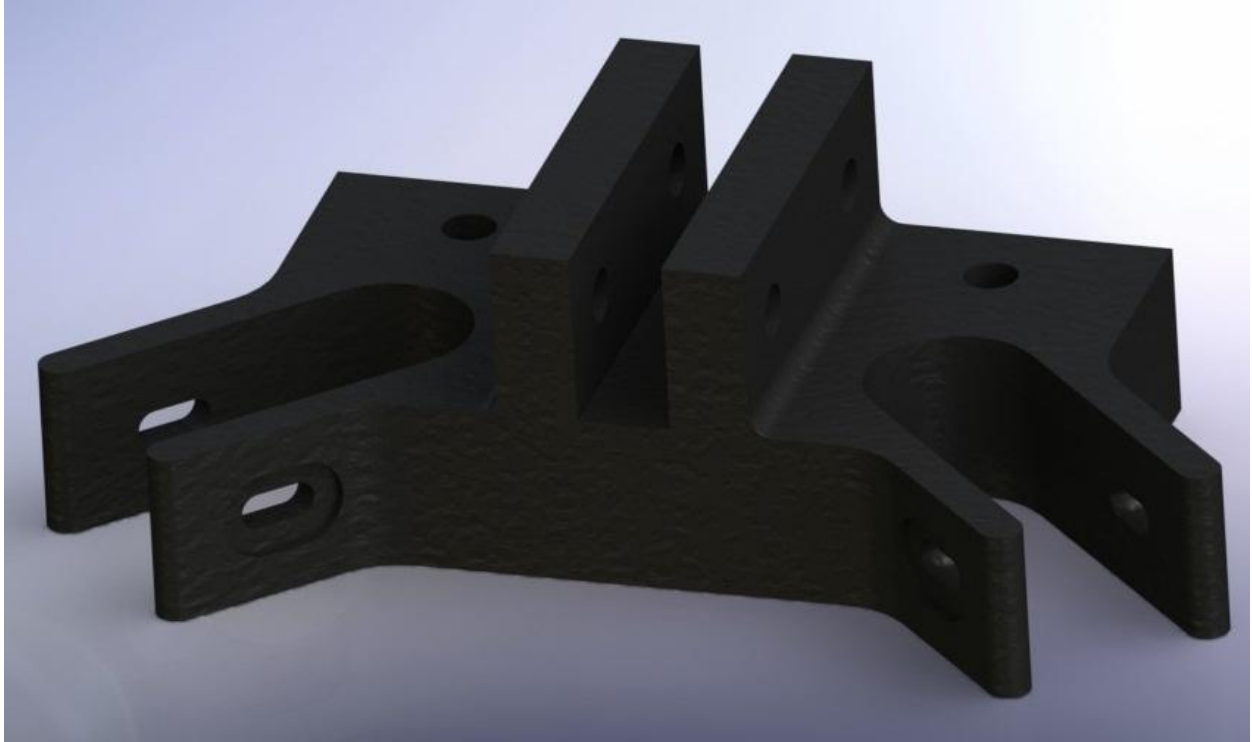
Rendered solid model of roller frame. The oval holes in the flanges were done on a manual mill
